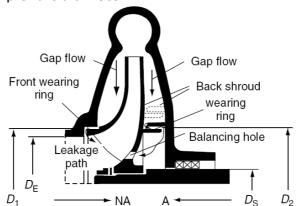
Closed Impeller with Wearing Rings on both Sides and Provided with Balancing Holes
